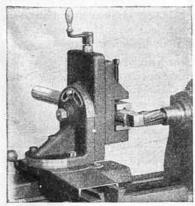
Squaring the End of a Shaft on a 9-inch Lathe
